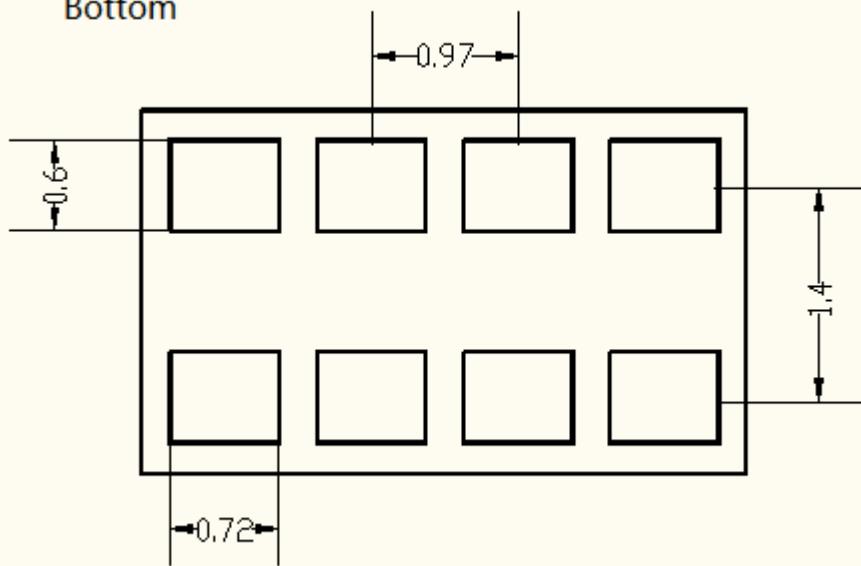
PCB layout design guide for EM30918-25 (all linear dimensions are in mm)
